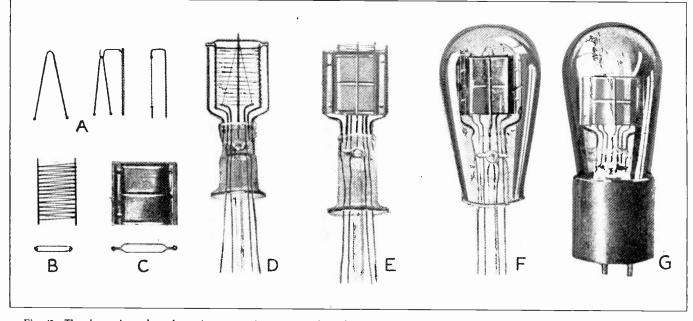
The above views show the various parts of a vacuum tube and illustrate the manner in which these parts are assembled and mounted in the complete tube. Refer to these views frequently while reading the accompanying paragraphs.
